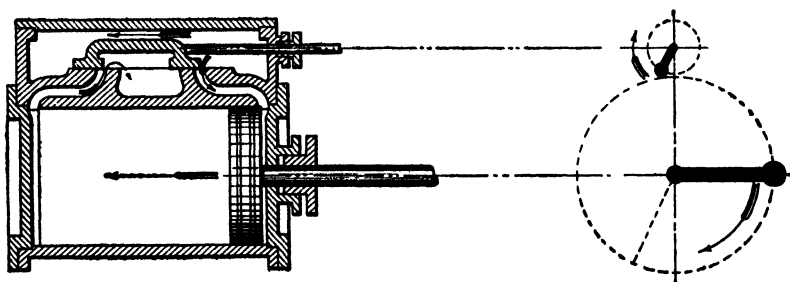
Position of Valve and Cylinder for Crank-End Admission
